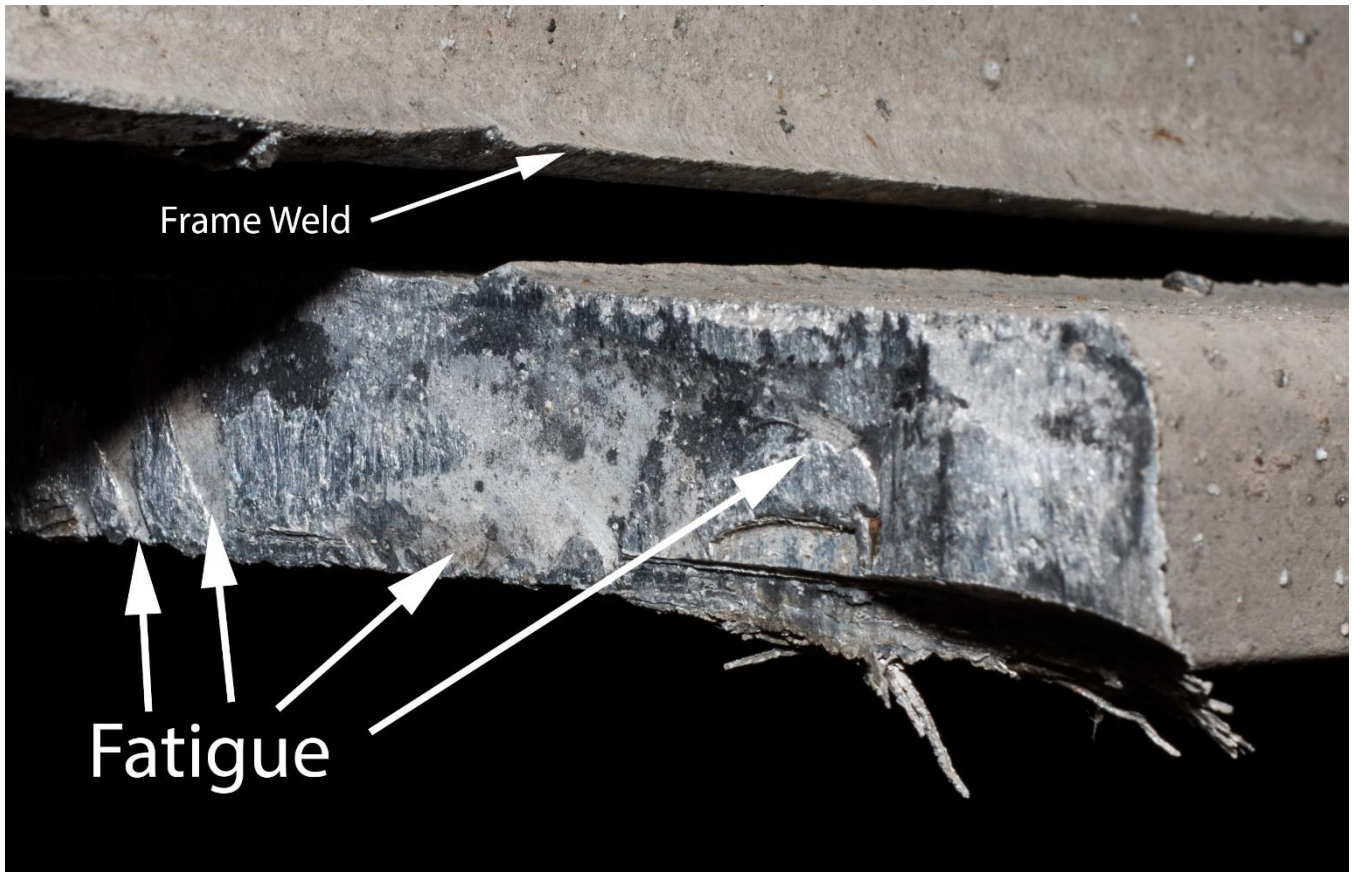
Fatigue on Flange Fracture Surface
